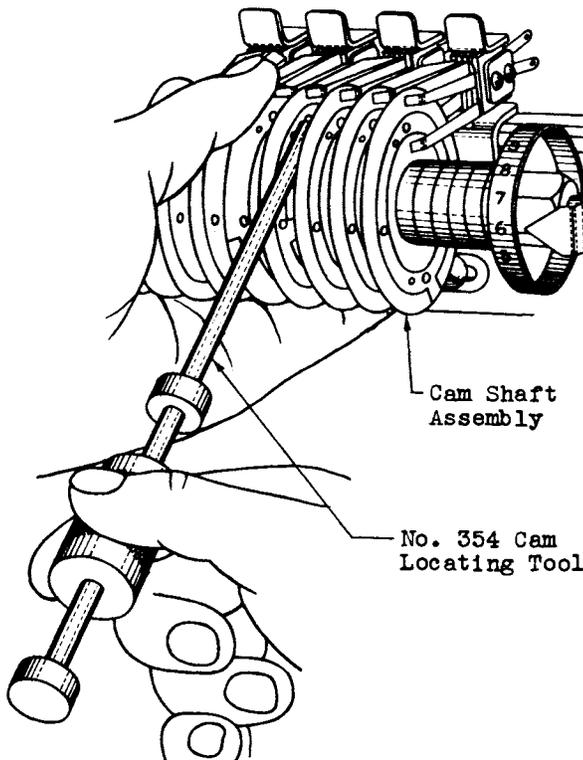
Locating Cams with the No. 354 Cam Locating Tool
